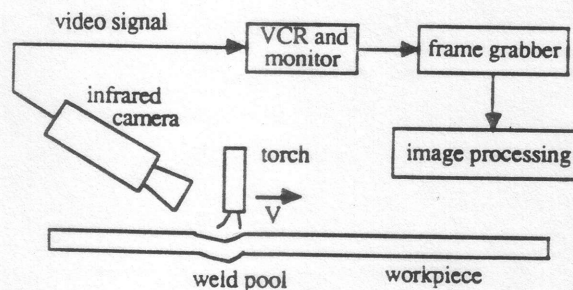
Experimental set-up for infrared sensing of GTA welding. In order to illustrate the possible depression associated with the GTA weld pool, the workpiece is shown by a cross section. The weld pool surface is, therefore, not shown in the figure.
